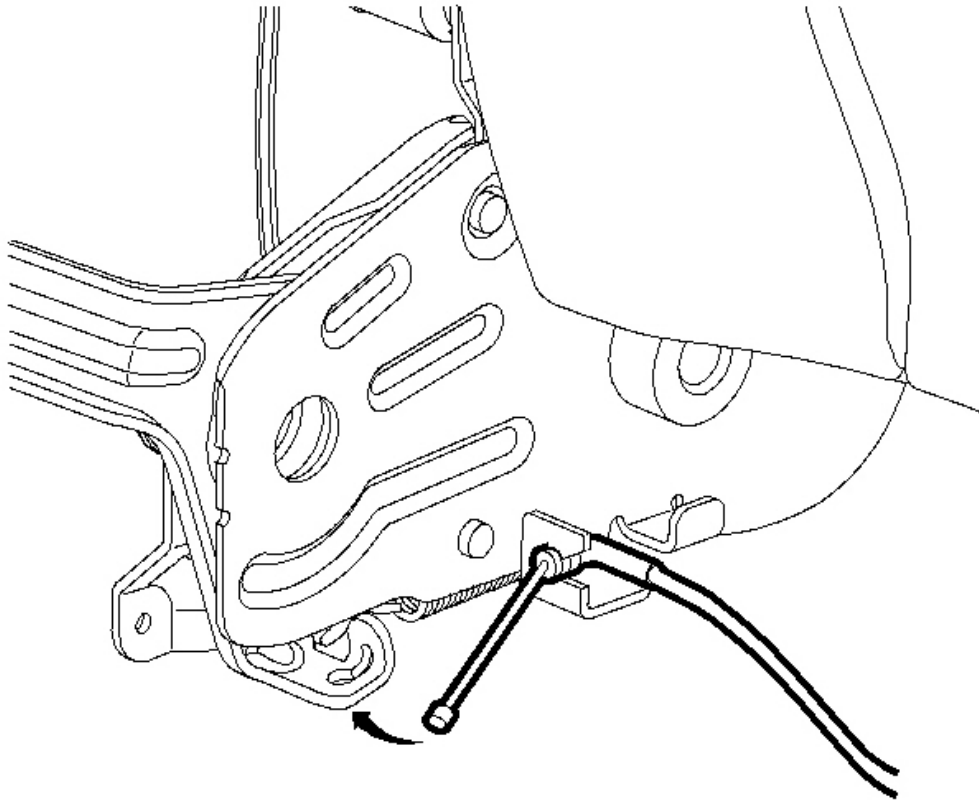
Disconnecting/Connecting Outboard End Of The Fold-Flat Cable
